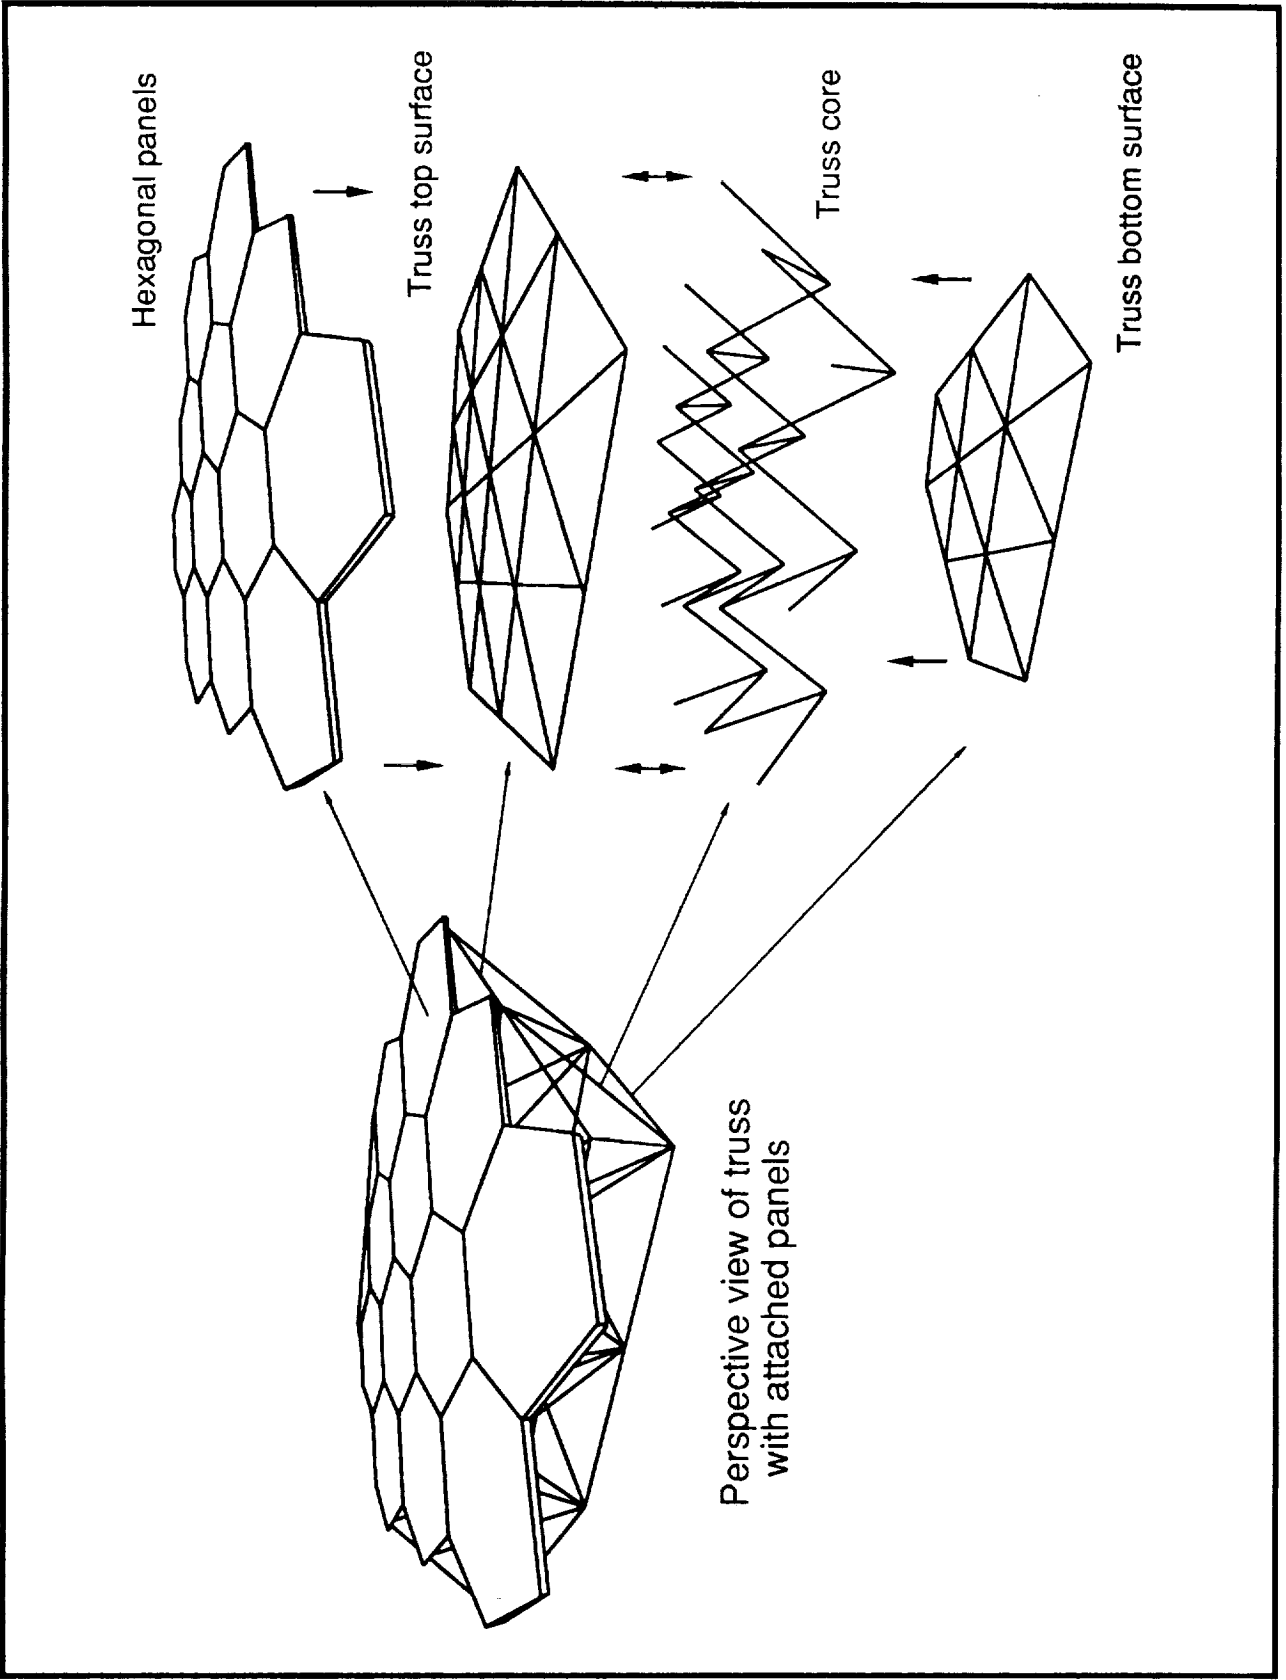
Perspective views of tetrahedral truss and hexagonal panels.
